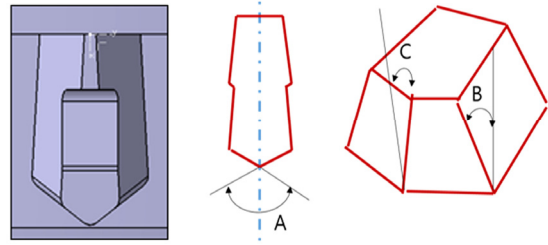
Design parameters and reference tooth shape of clutch body gear
